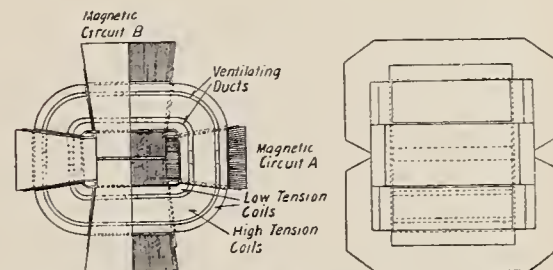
LATEST FORM OF THE SHELL-TYPE TRANSFORMER
